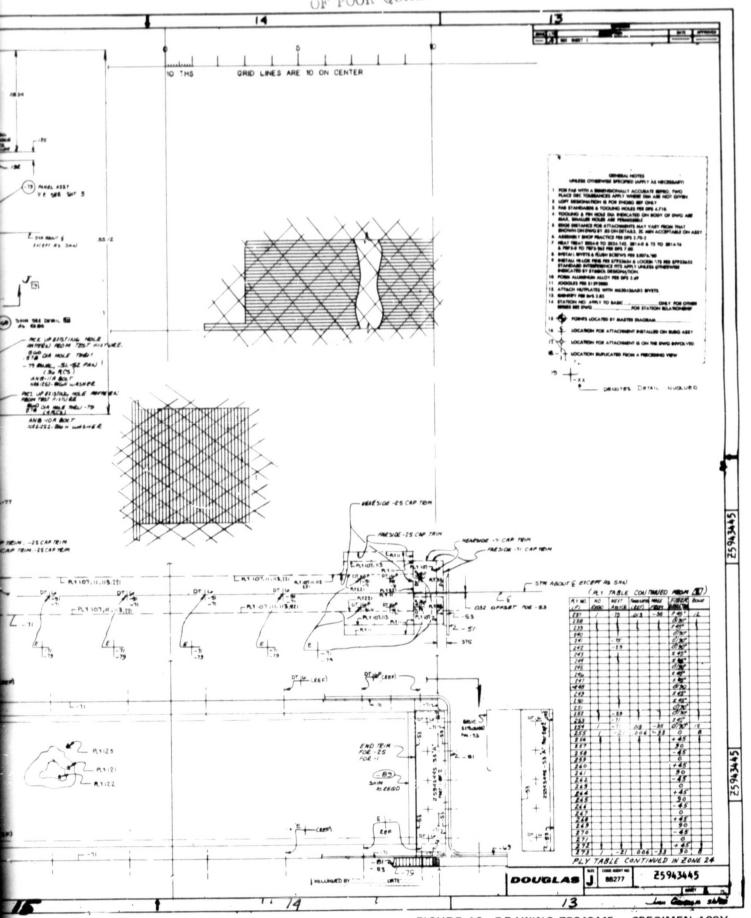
DRAWING Z5943445 — SPECIMEN ASSY —
